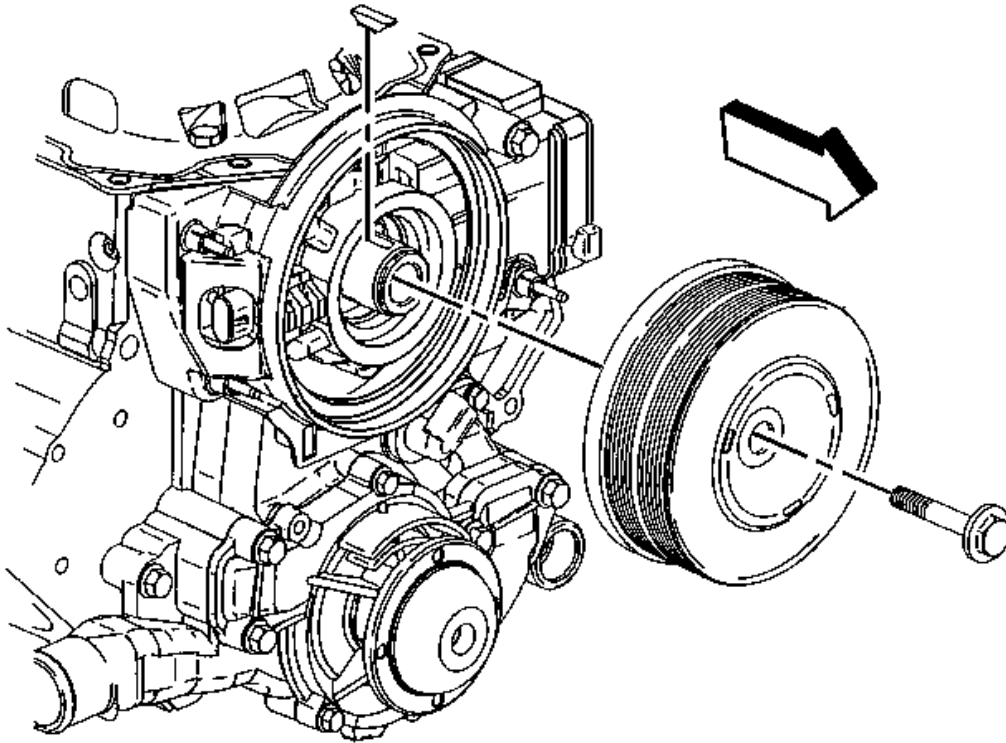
View of Crankshaft Balancer and Bolts with J 37096 & J 45059
